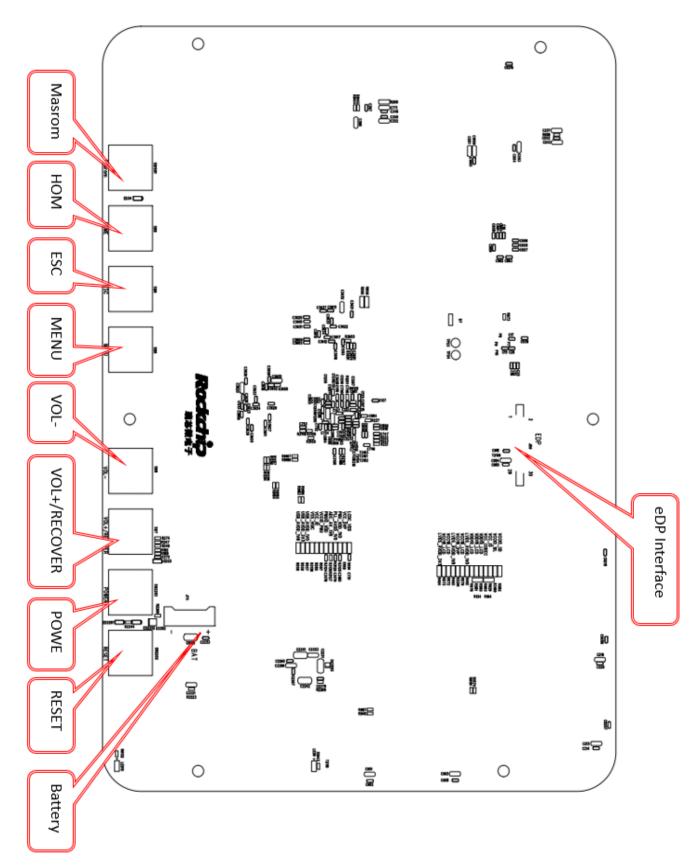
RK3288 EVB 2.0 PCB bottom layer
